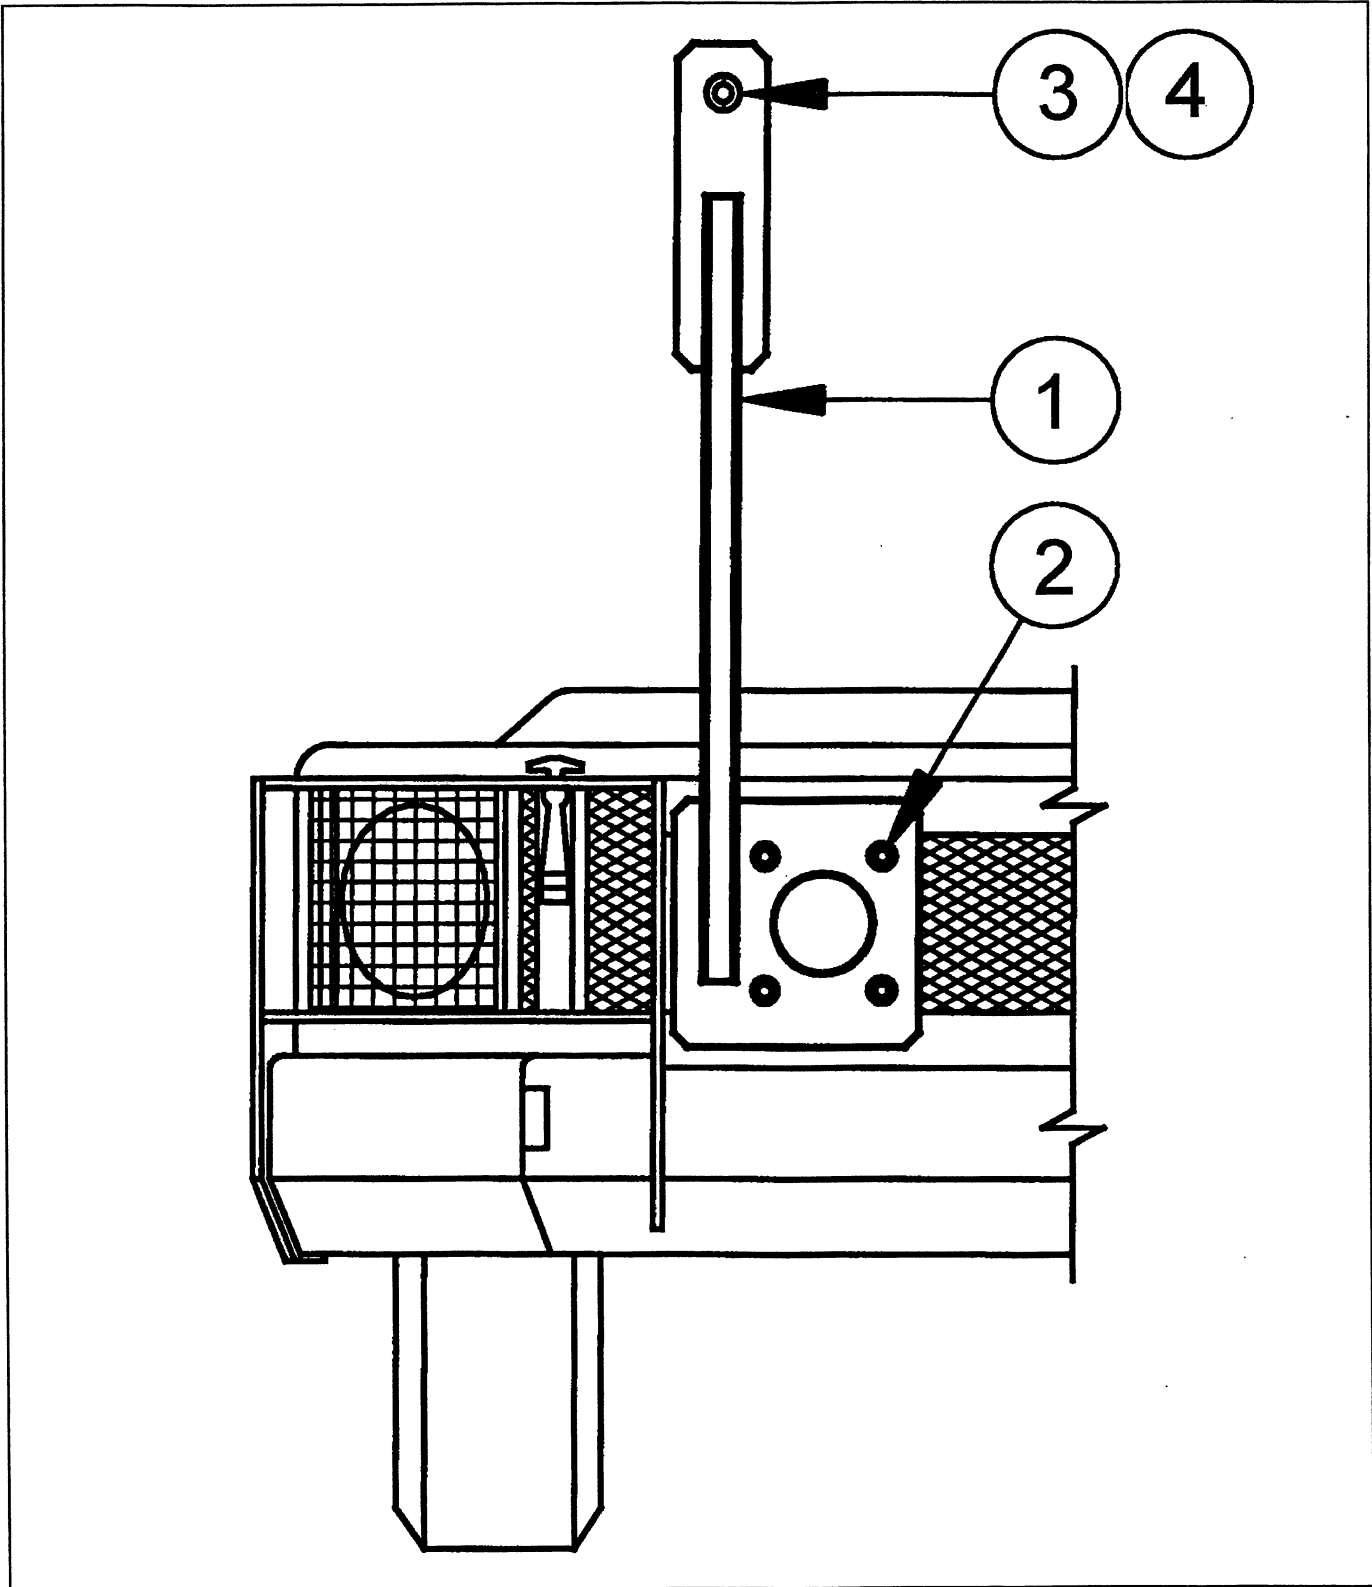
(Sheet 1 of 2) Whip Support Assembly Installation
